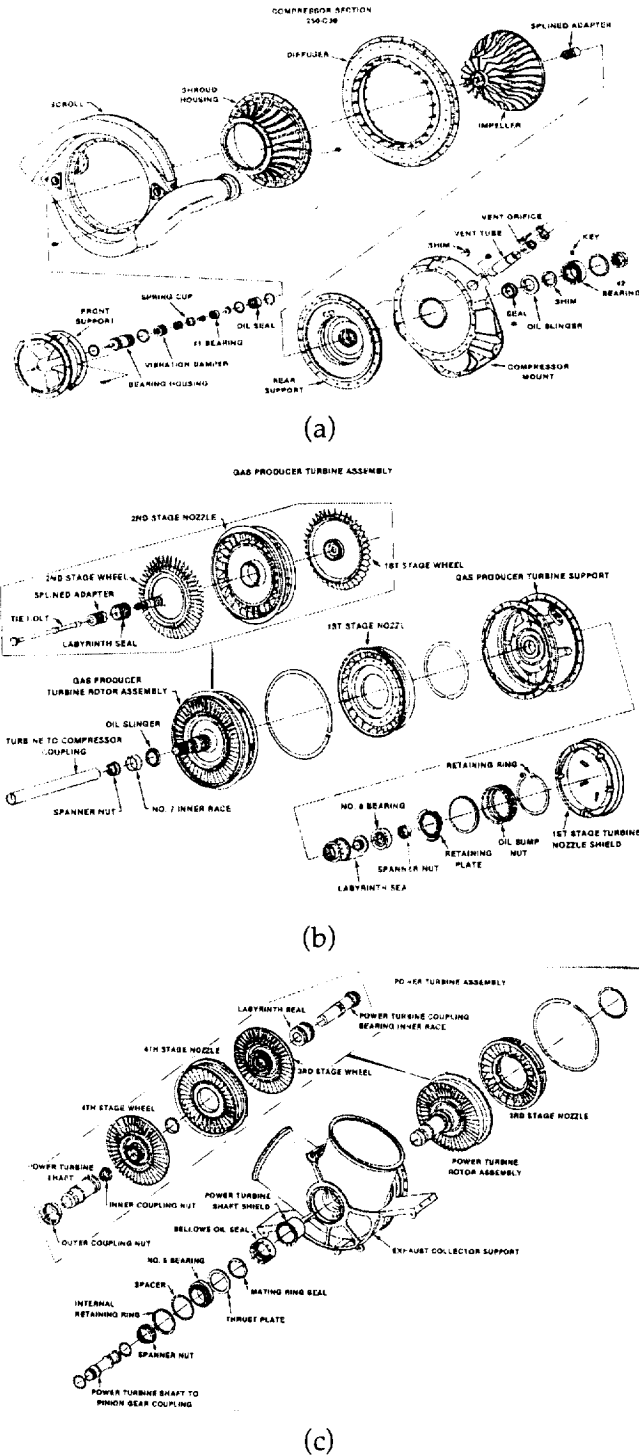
Compressor assembly (a), gas producer assembly (b), and power turbine assembly (c) of the Allison 250 engine.
